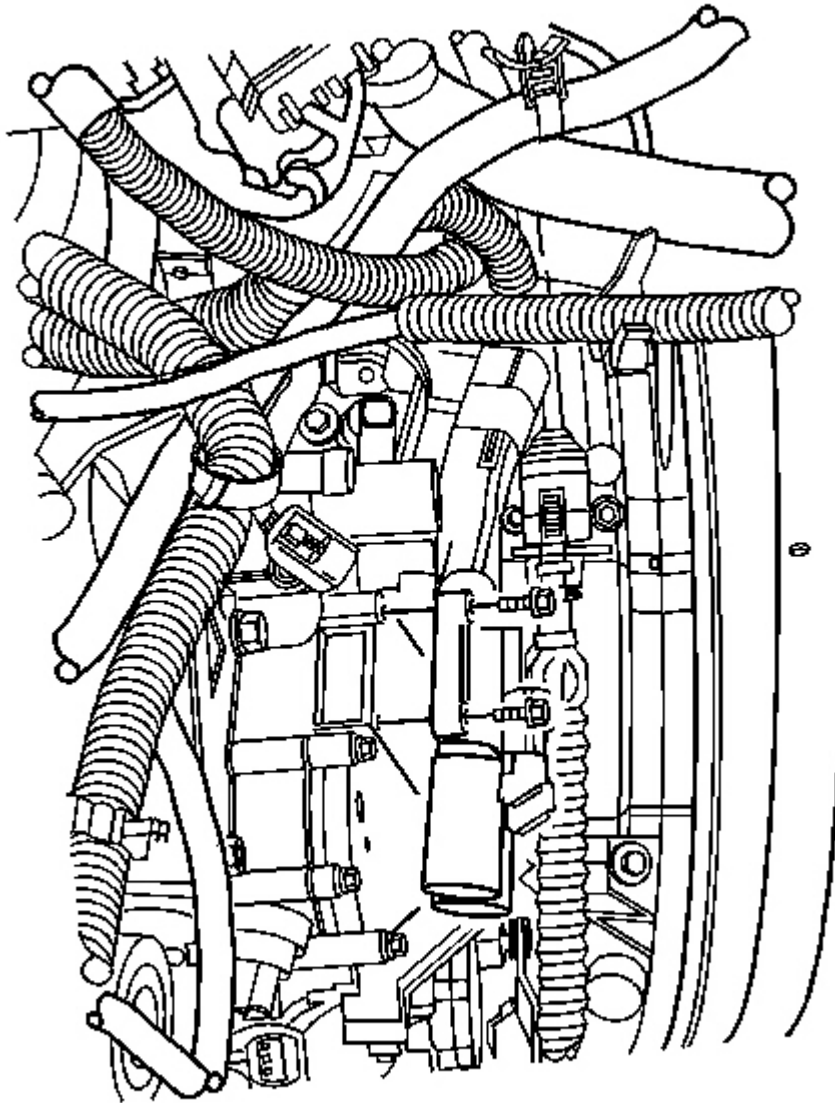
Solenoid Assembly Electrical Connectors, Gasket & Bolts
